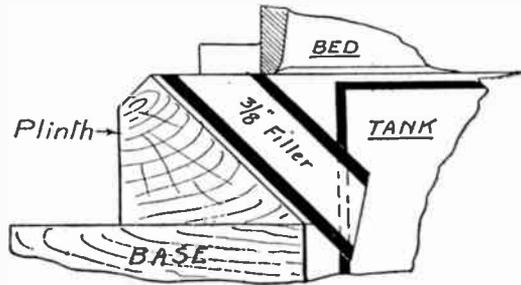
ALTERNATIVE DESIGN FOR FILLER, WHERE PLINTH BOARD IS USED. (Half full size.)
